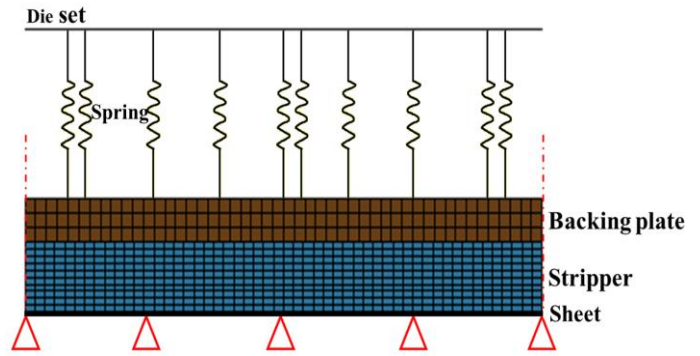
FE model for analyzing blank holding pressure of the sheet
